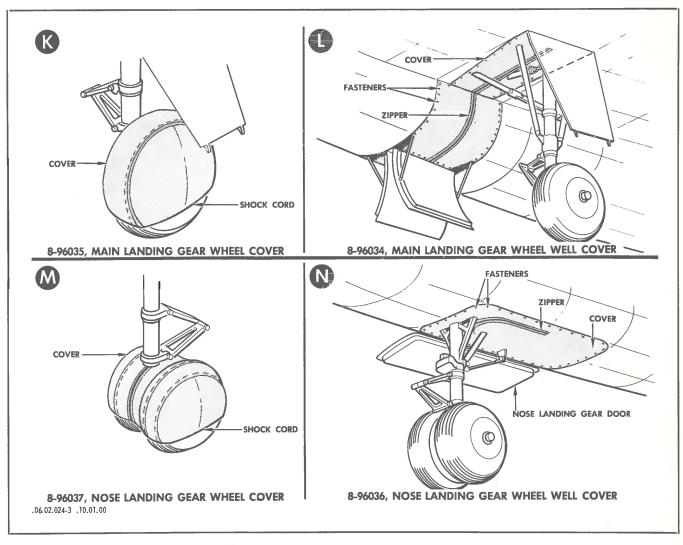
Protective Cover Installation (Sheet 3 of 3)
